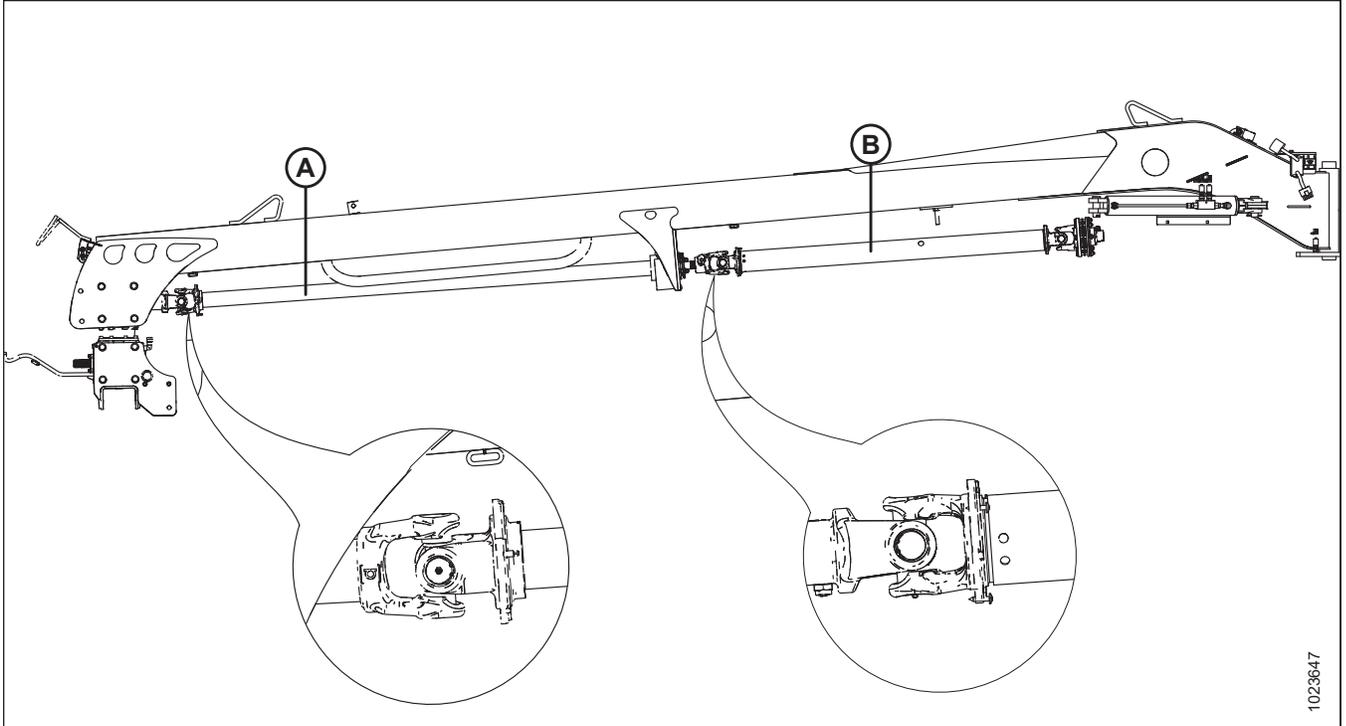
R113 Rotary Disc Pull-Type Pull-Type Driveline Phasing
